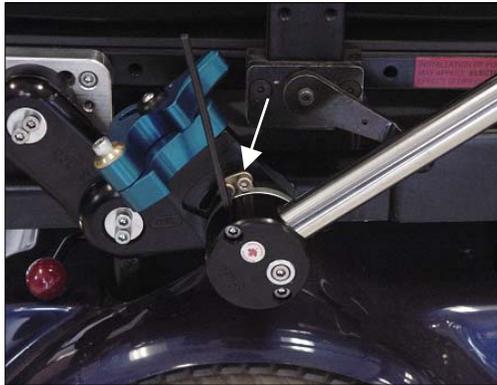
With the Side Tube in the correct folded position use the Allen key to pull the Rear Stop forward and tighten the bolts.
